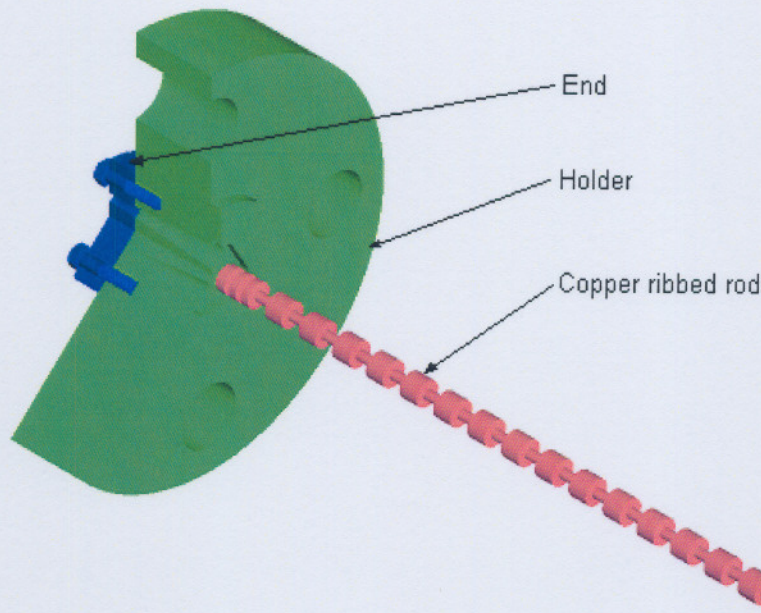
Electrical lead-out assembly (Appendix 7: drawing INST_ELO)
